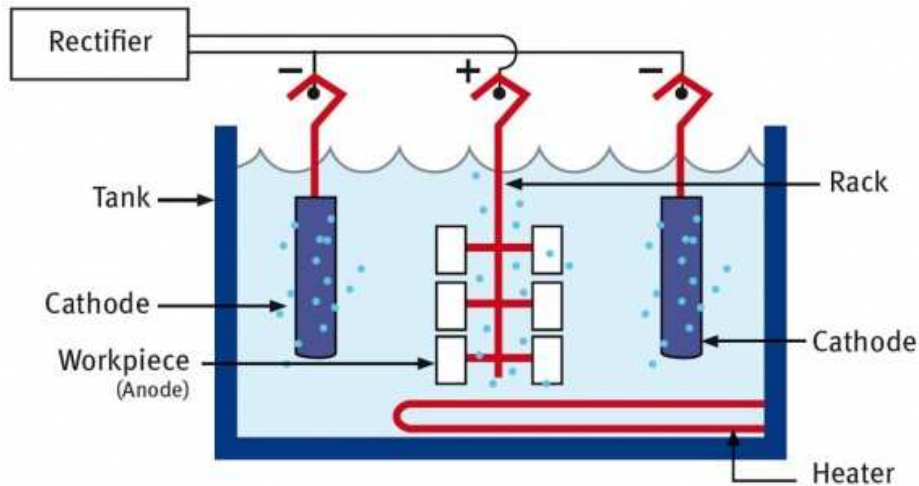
Mains parts of the electro-polishing machine. Source: www.chimiderouil.com
